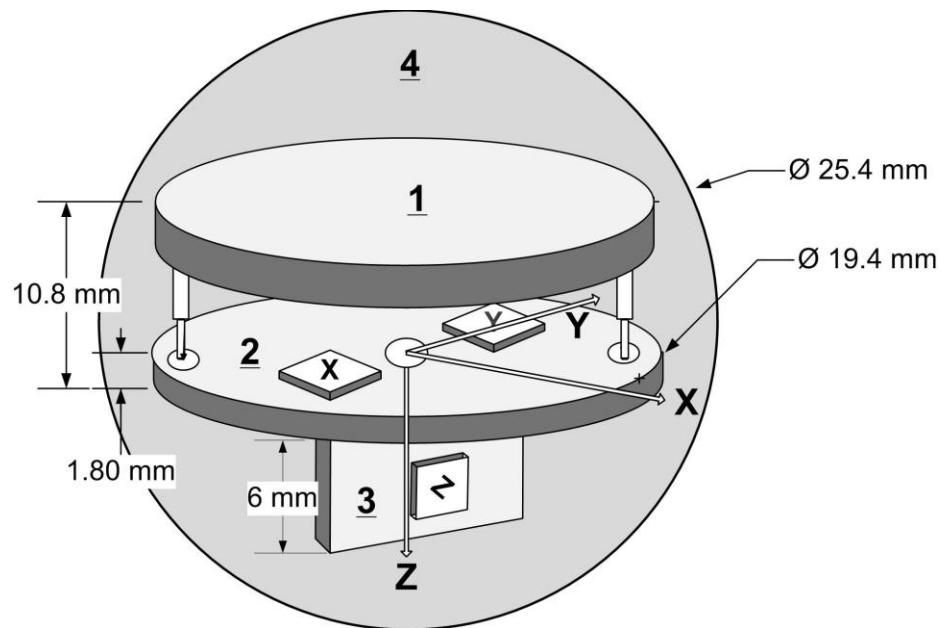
Inside structure of the BIRD sensor; 1.Rechargeable coin cell. 2. Main PCB board
